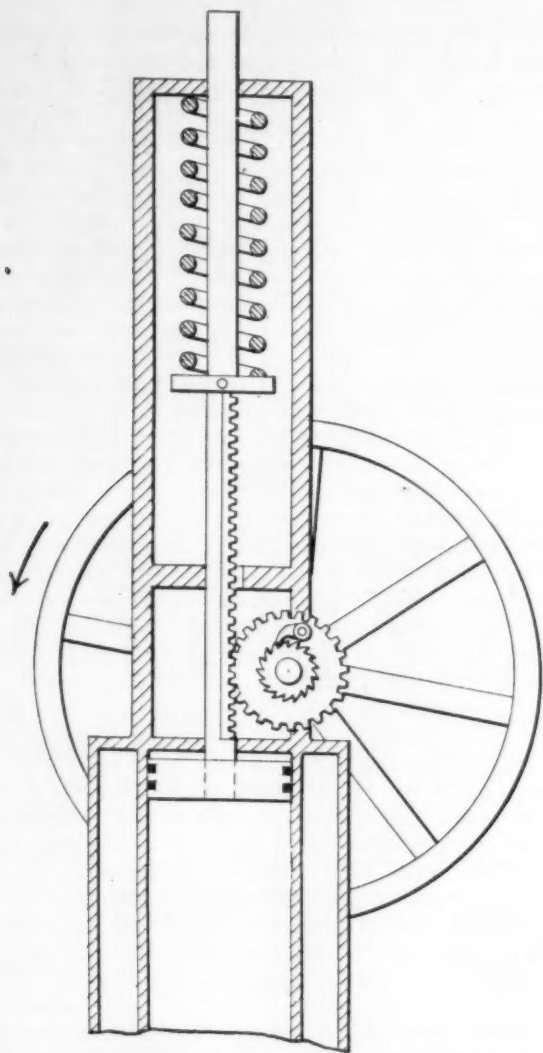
A FOREIGN TYPE OF ENGINE IN WHICH THE HEIGHT TO WHICH THE PISTON IS THROWN BY THE IGNITION OF THE EXPLOSIVE MIXTURE IS REGULATED BY A SPRING WHICH ON THE RETURN STROKE DRIVES THE CRANKSHAFT THROUGH A RACK AND PINION
